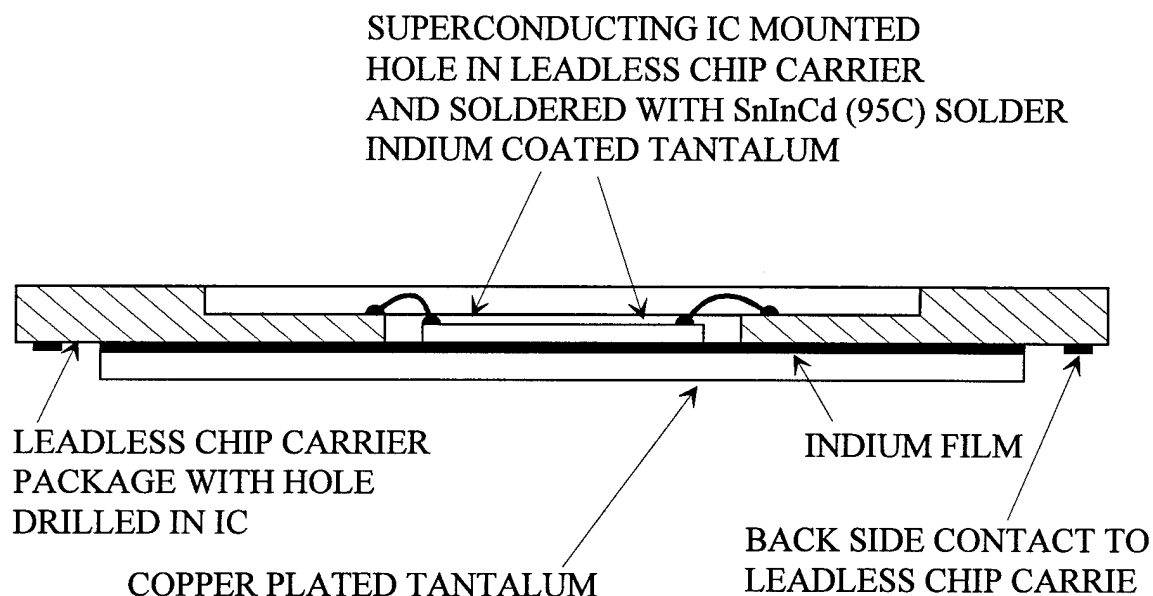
Assembly of Tantalum base, with IC soldered to it, glued to the back of a ceramic package pre-drilled with a hole in the IC well.
